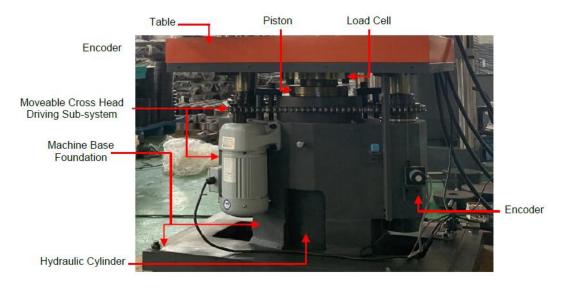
Hydraulic cylinder assembly to machine base foundation
